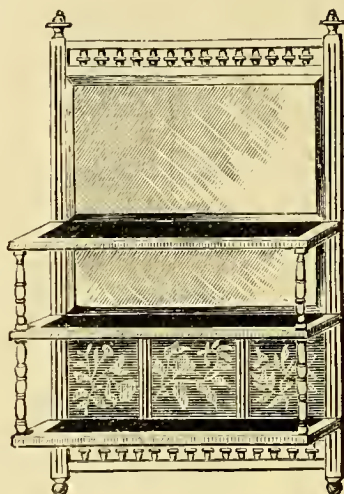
PERSPECTIVE VIEW OF SHELVES.
